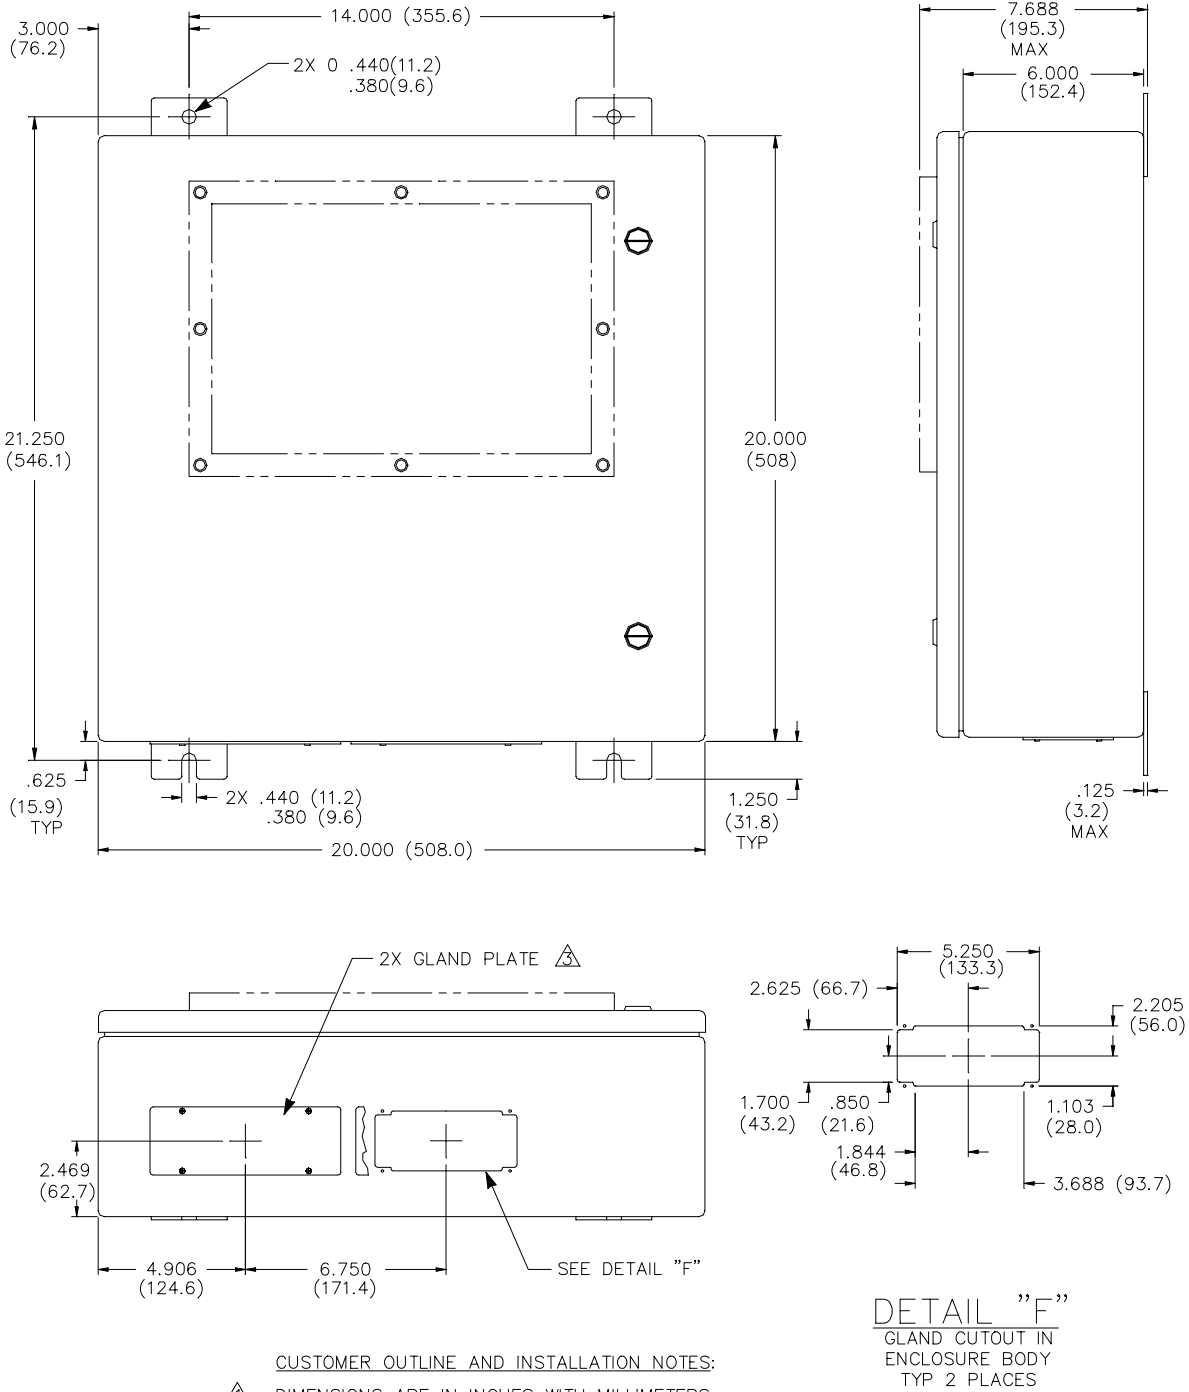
shows 505H control layout and mounting pattern. The 505H is housed in a flush mount enclosure. This enclosure is designed for installation within a control room panel or cabinet, and, by itself, cannot be bulkhead-mounted. The 505H package, once properly installed within a NEMA4 panel or cabinet meets NEMA 4X ratings. All field wiring connects to the 505H through removable terminal blocks located on the 505H's back side.
